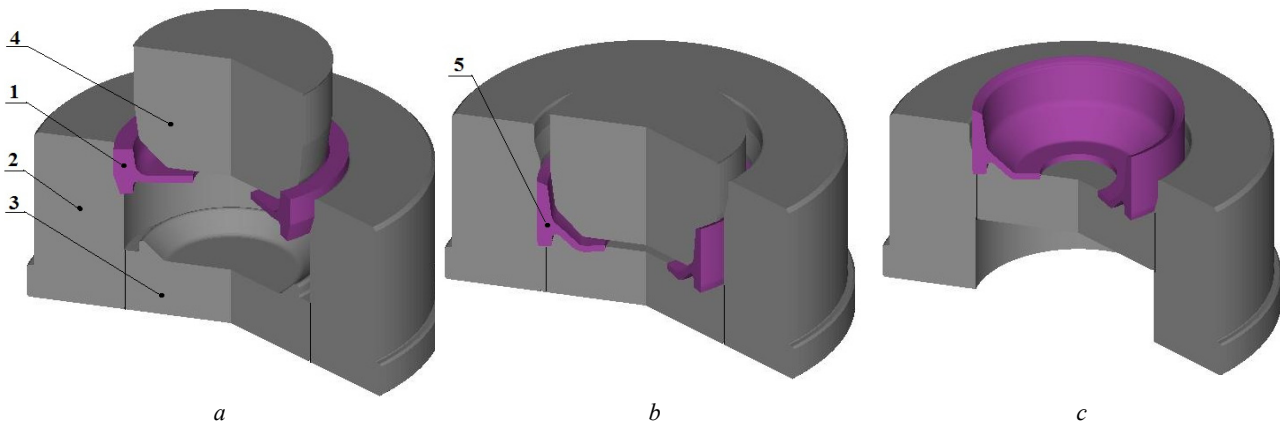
The calculated position of the deforming tool in section during forming: a – at the beginning of stamping, b – at the end of forming, c – after ejection of the product
